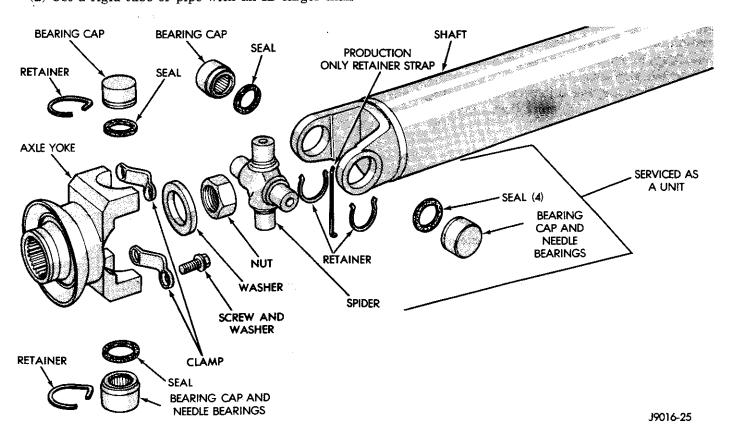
Single Cardan U-Joint At Fixed Yoke — Disassembled
